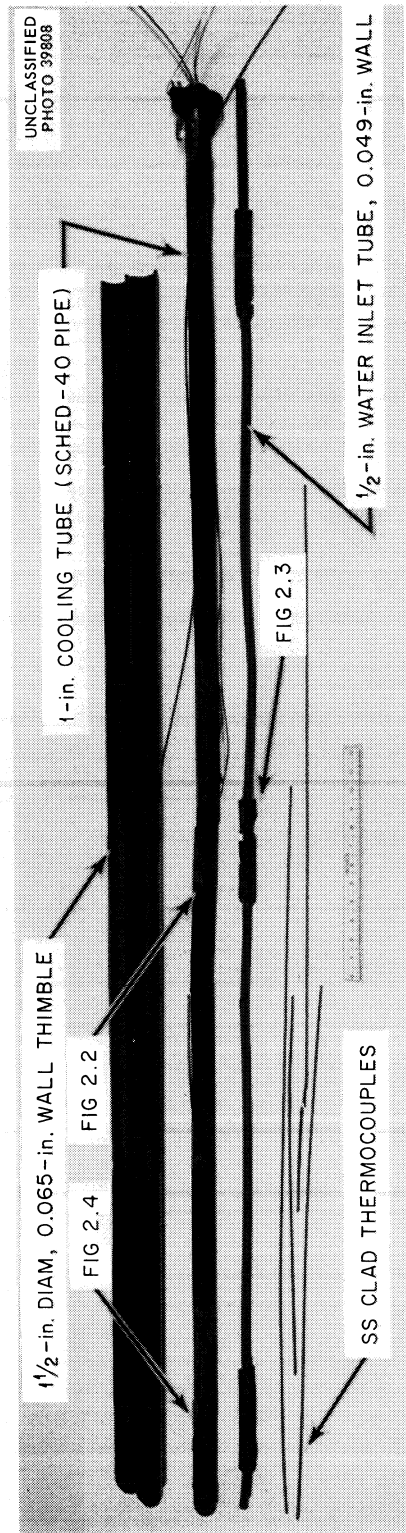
Drain-Tank Cooler Assembly After Test.
